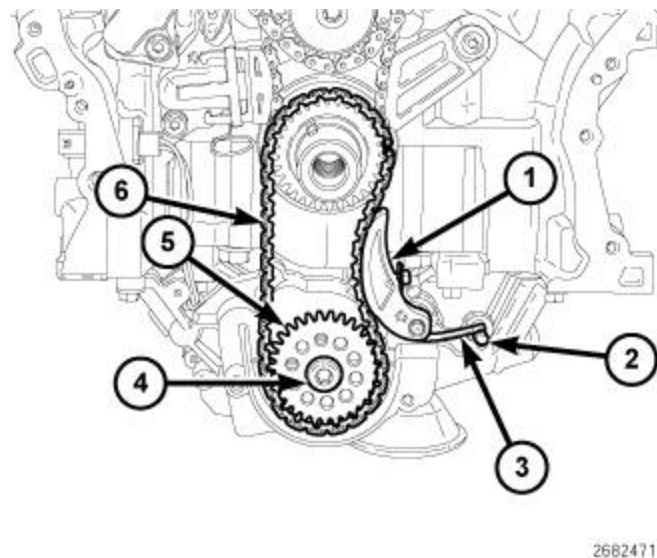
Oil Pump Chain Tensioner, Spring, Retaining Bolt, Dowel Pin, Oil Pump Sprocket & Oil Pump Chain
